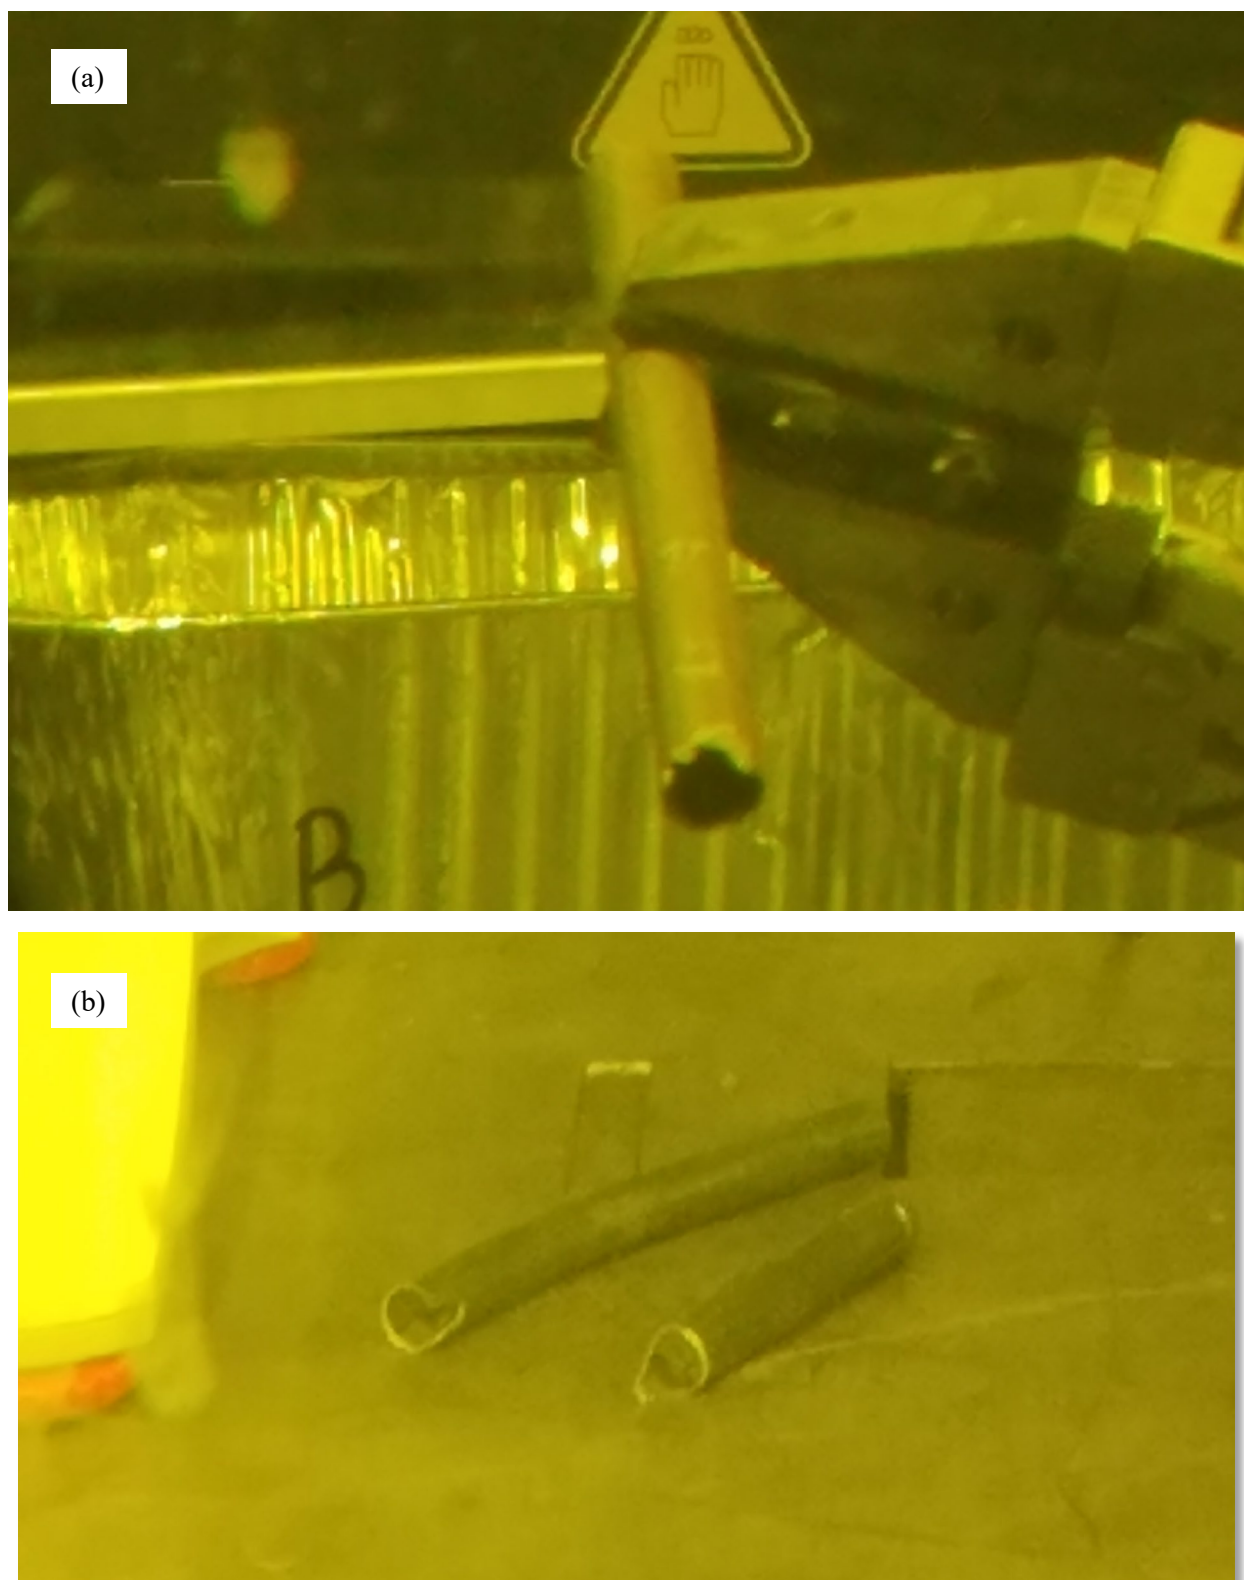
(a) An example of through-section fracture with secondary tearing, and (b) fracture that occurred in the body of the pellet.
